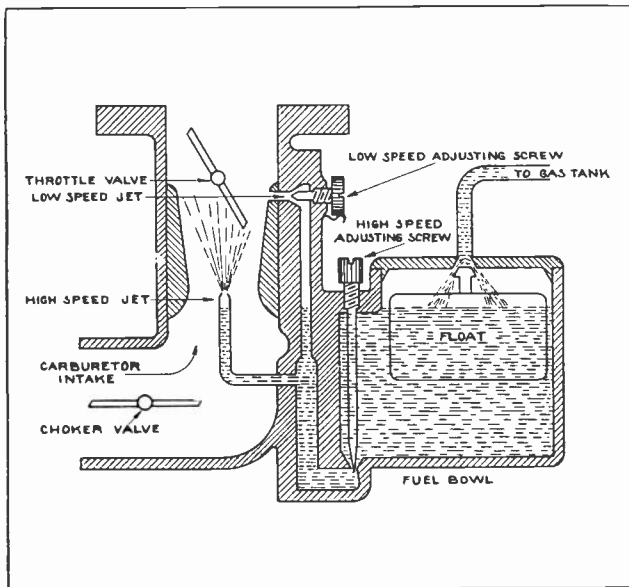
Diagram showing a sectional view and the operating principles of a simple carburetor used for supplying the proper mixture of gasoline and air for fuel to the engine.
